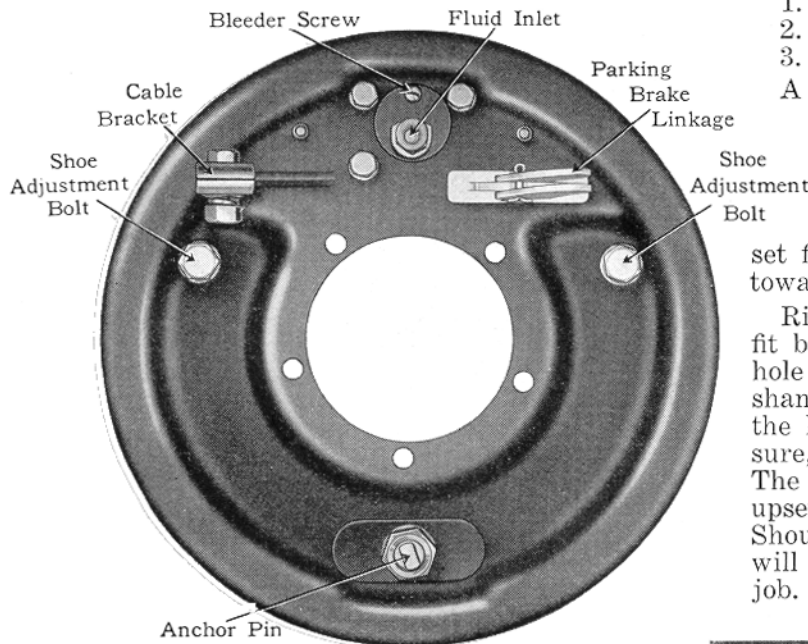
REAR VIEW, DUST SHIELD ASSEMBLY
